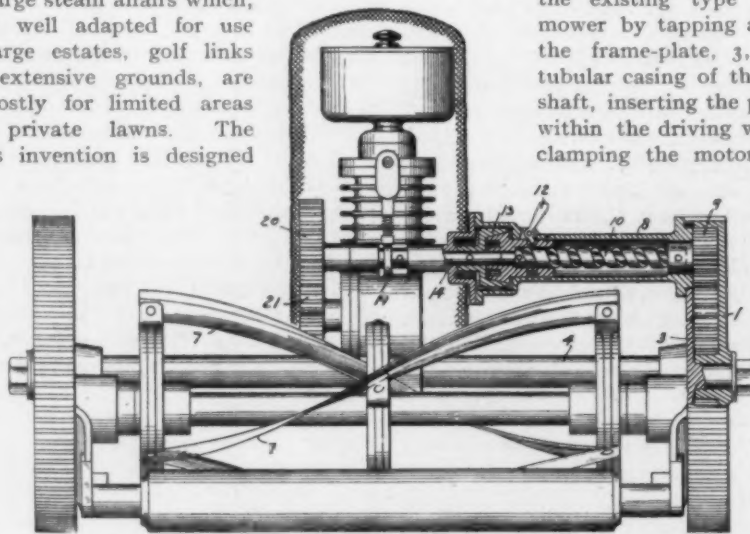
REAR VIEW OF AIR-COOLED MOTOR LAWN MOWER.
